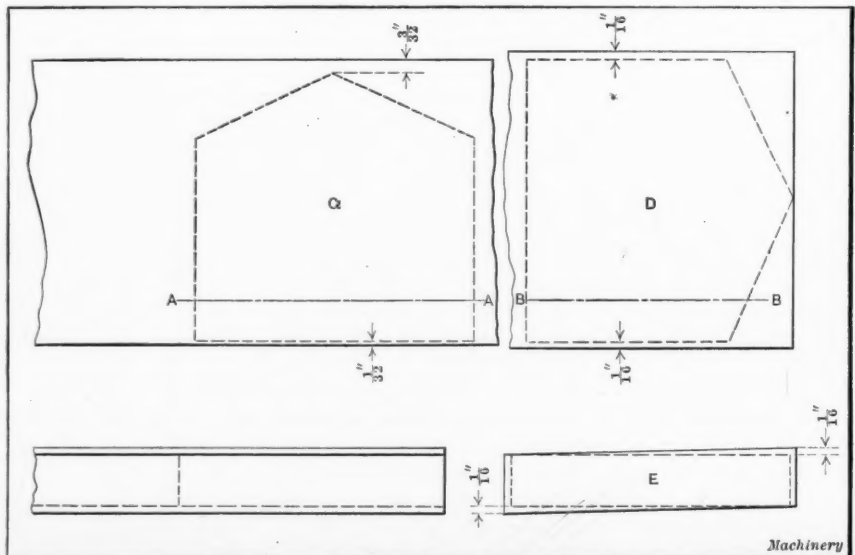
Proper Way for Grain to run and Suggestion in regard to making Tools
